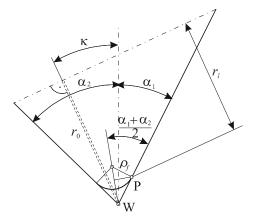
Geometric model for determining the limit radius r_1 of the rectilinear part of the cutting edge [3]
